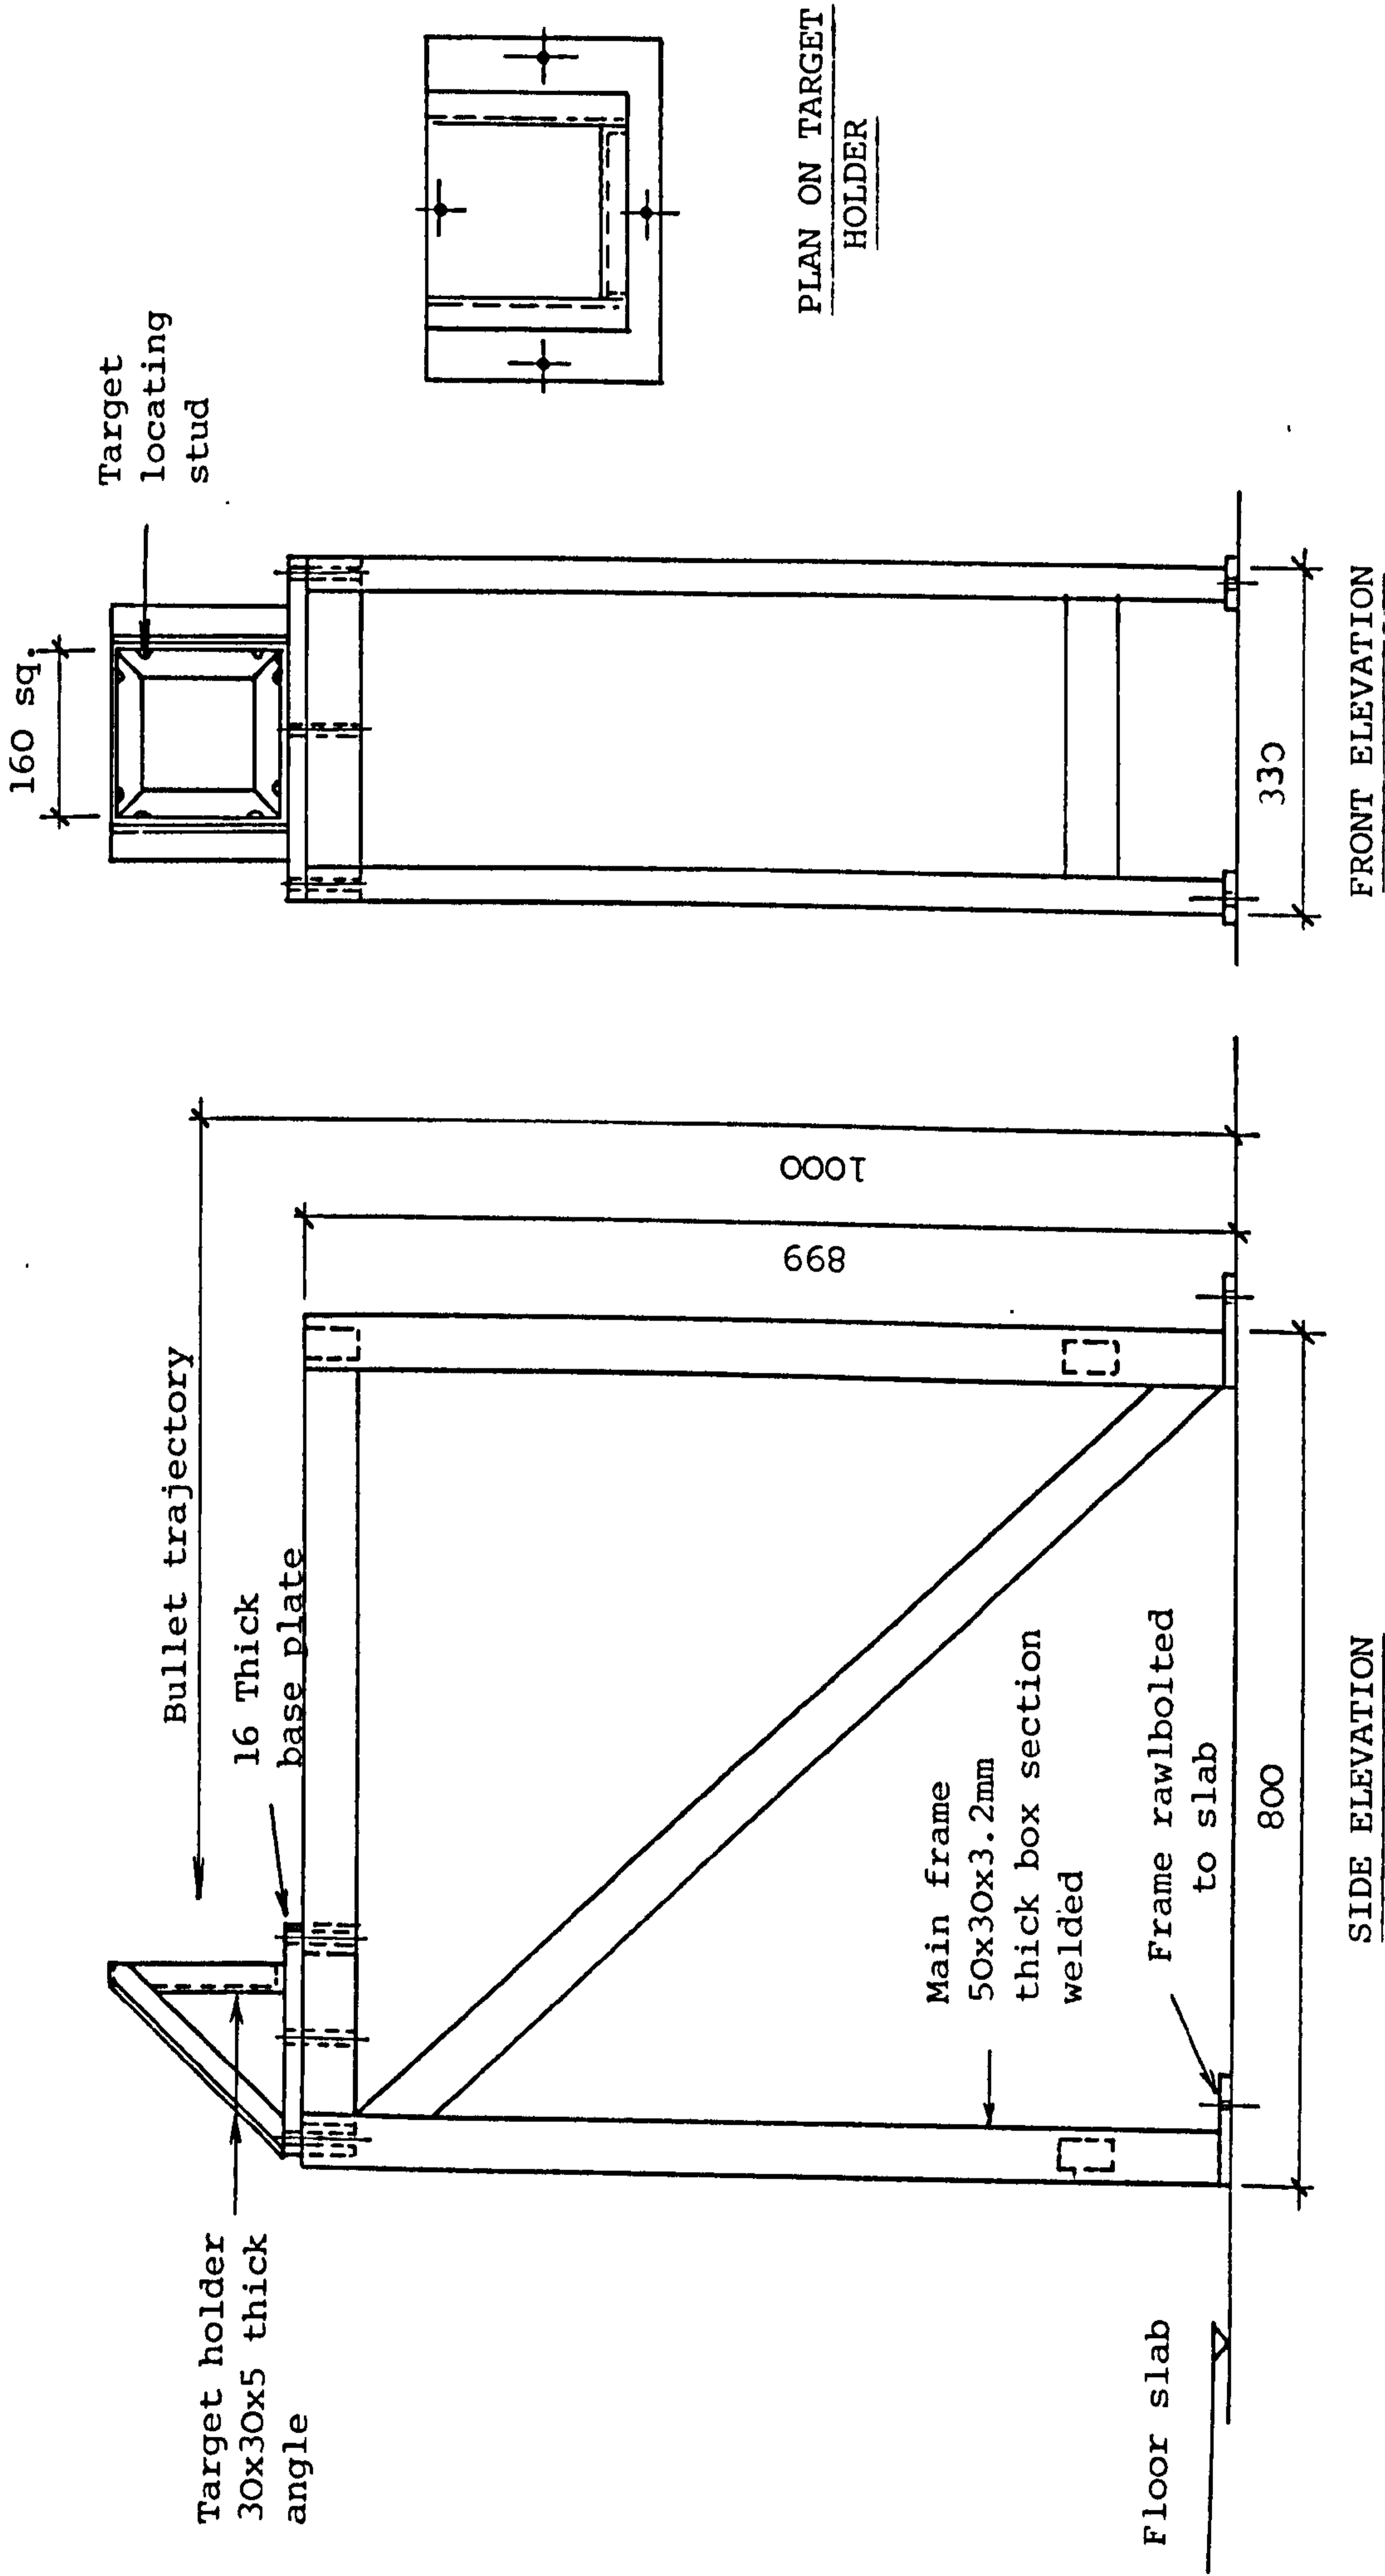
DETAILS OF TARGET HOLDER AND MOUNTING FRAME
